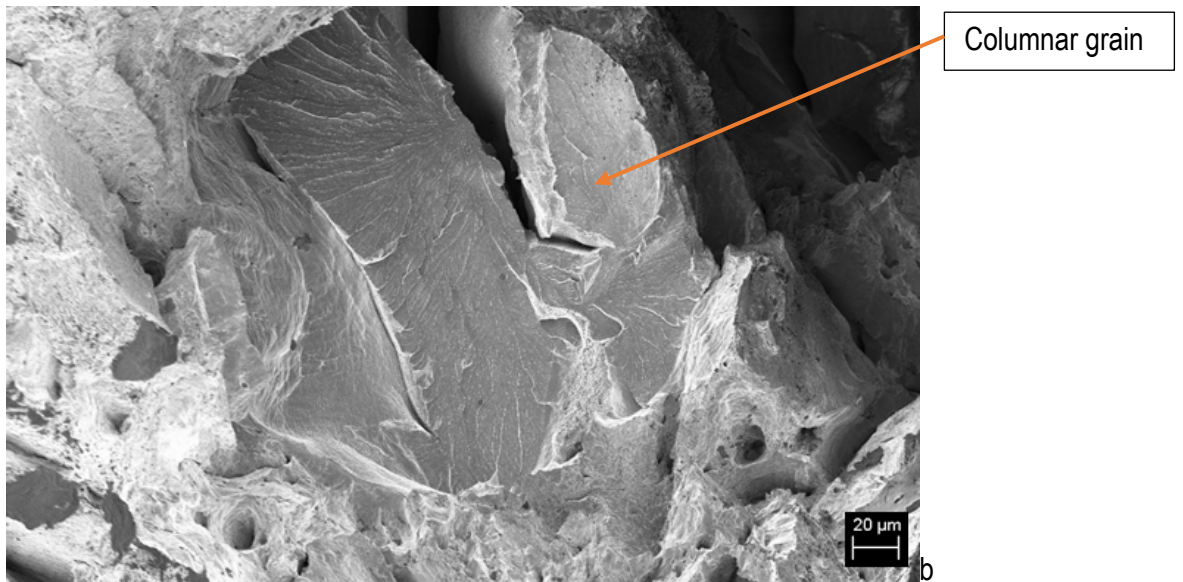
Scanning electron fractograph of Grade 436 weld metal. Ductile dimples, cleavage fracture and intergranular fracture was observed. (Weld ID: AA19010, with an electrode tip angle of 30°, pulse frequency of 15Hz, peak welding current of 190A and a welding speed of 10 mm/s. The sample had 180 μm average grain size and a 29% elongation).
